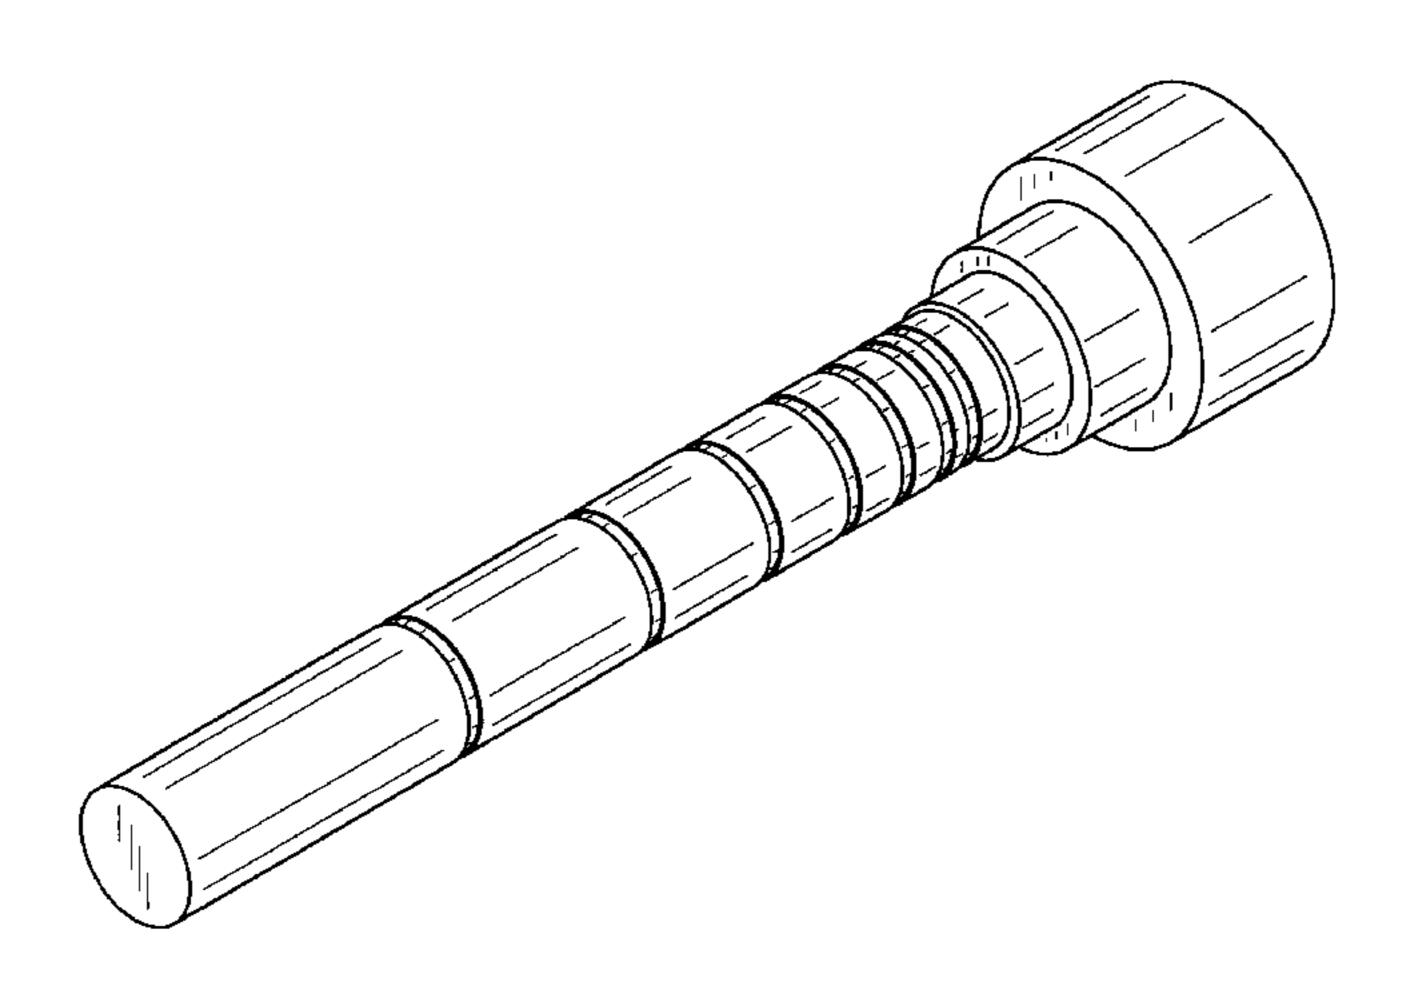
is a front perspective view of the fourth embodiment of the design;
